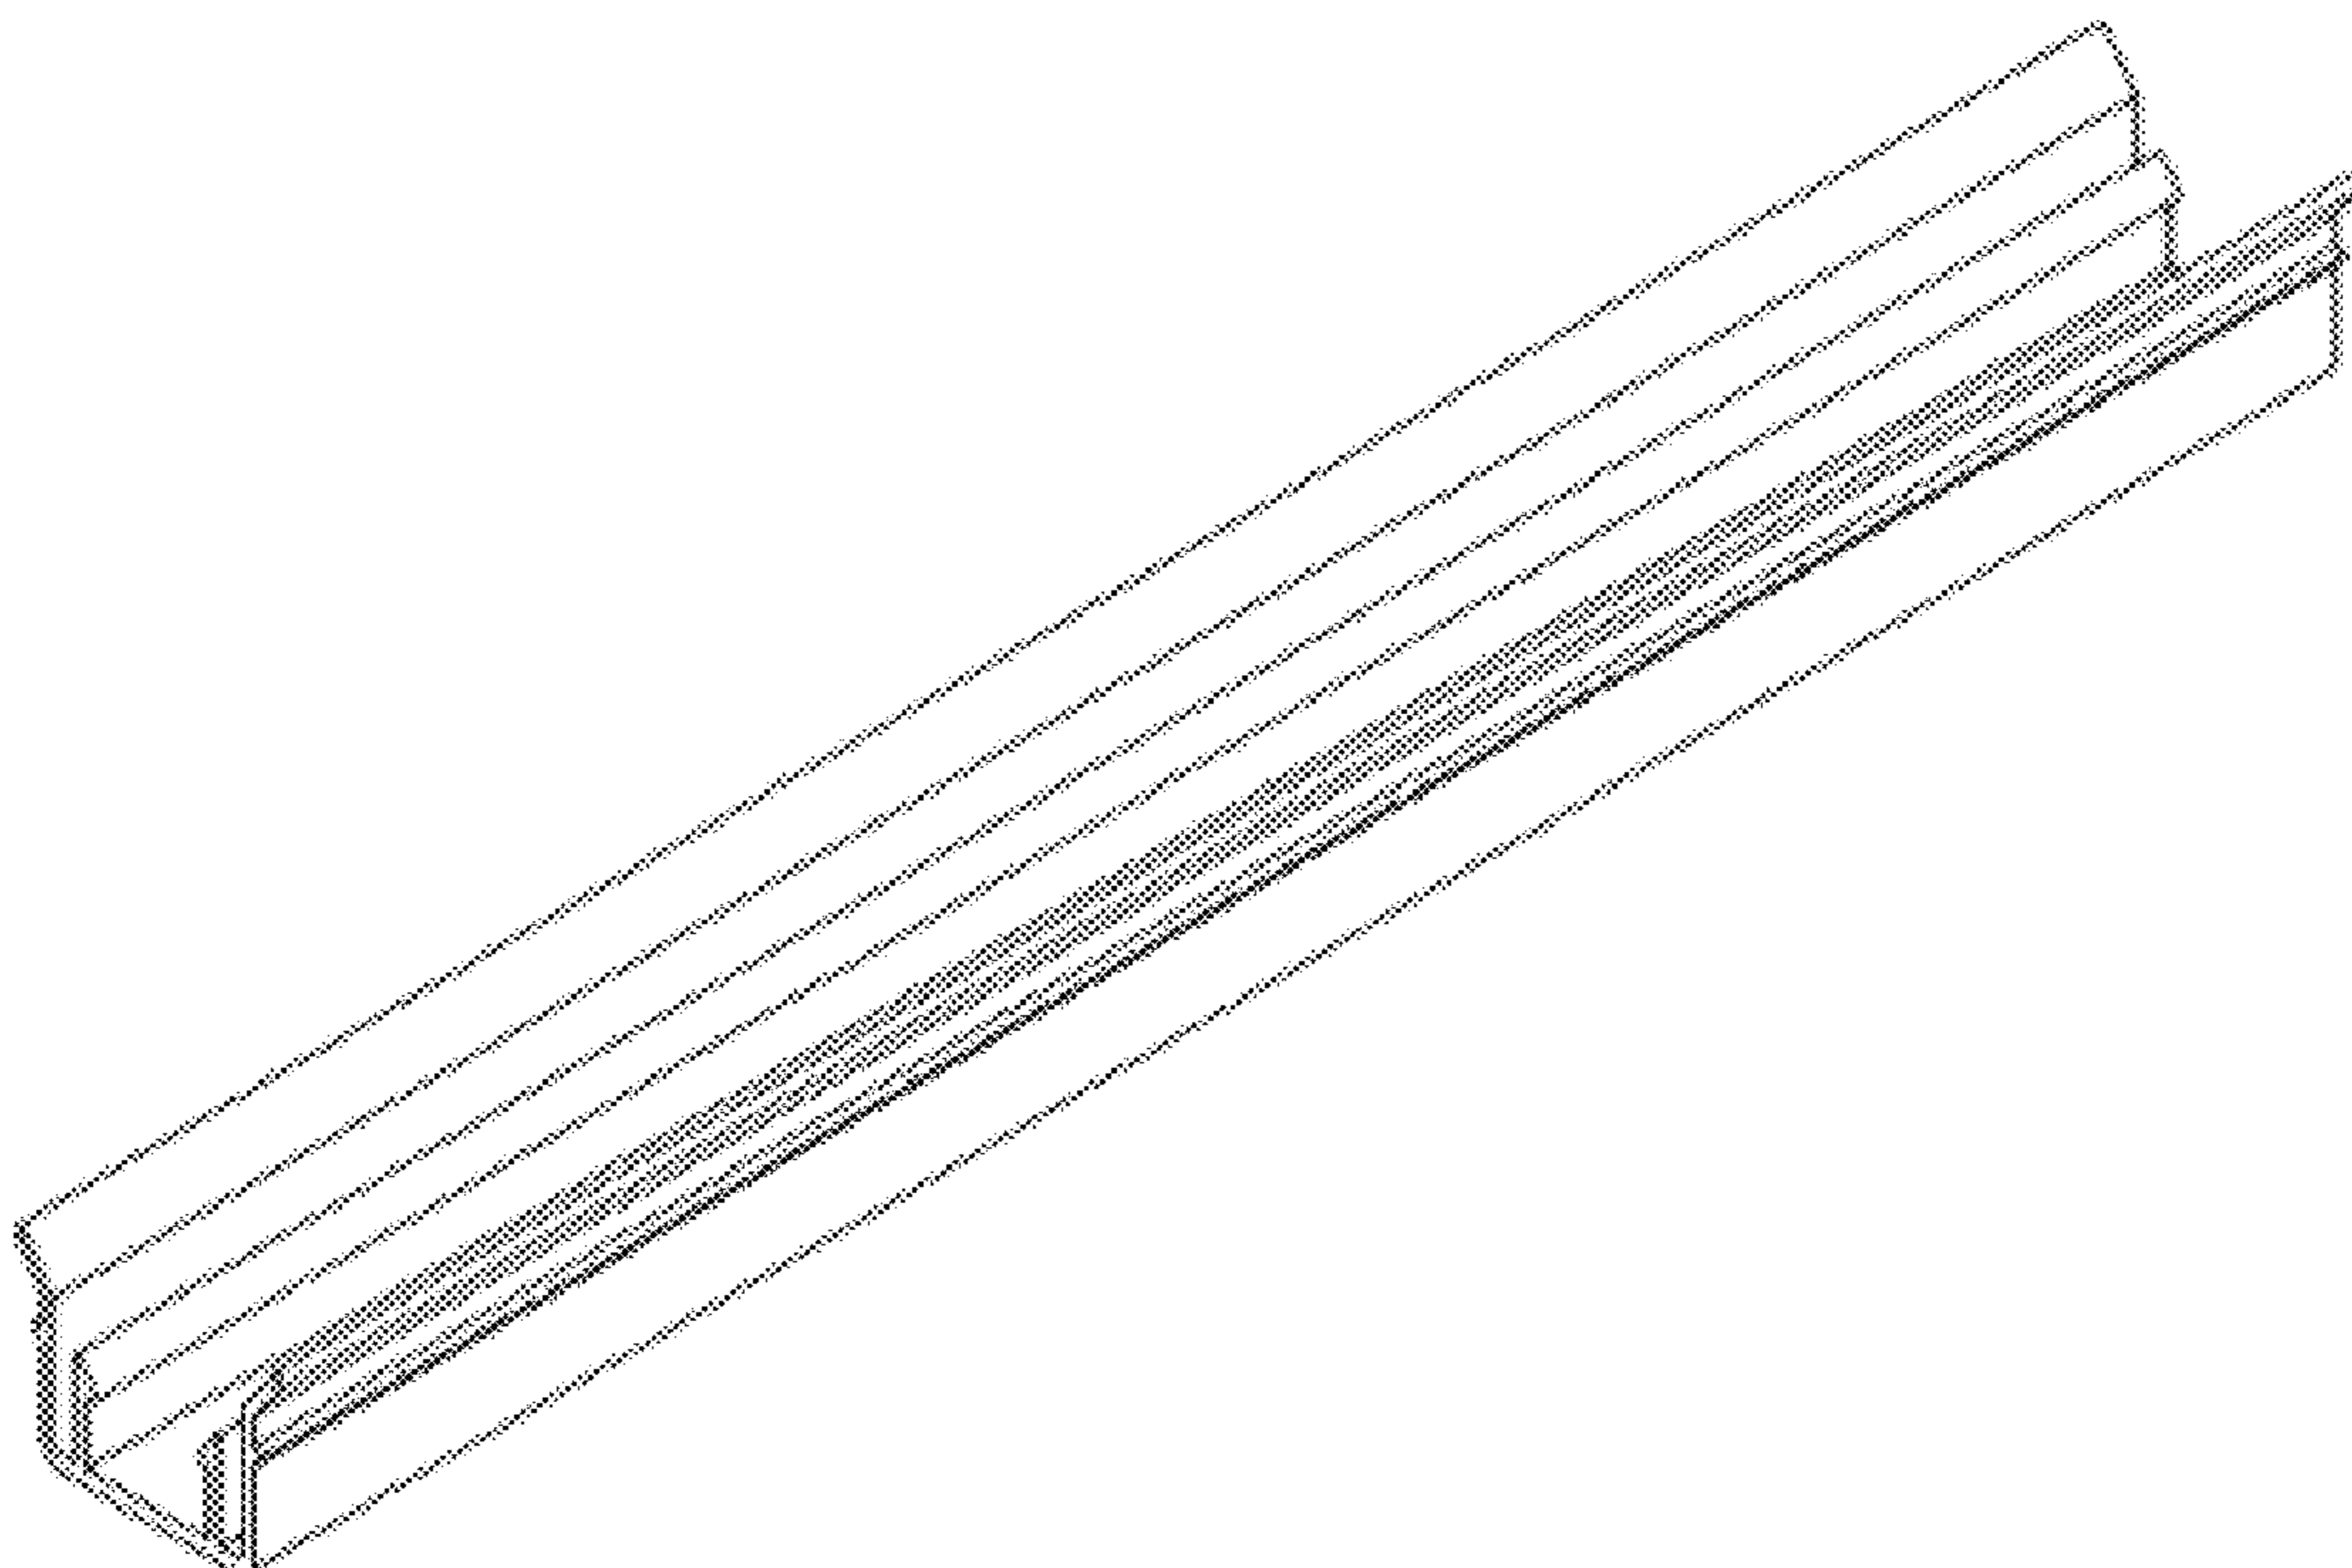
is perspective view of the snap mounting channel of the present invention;
